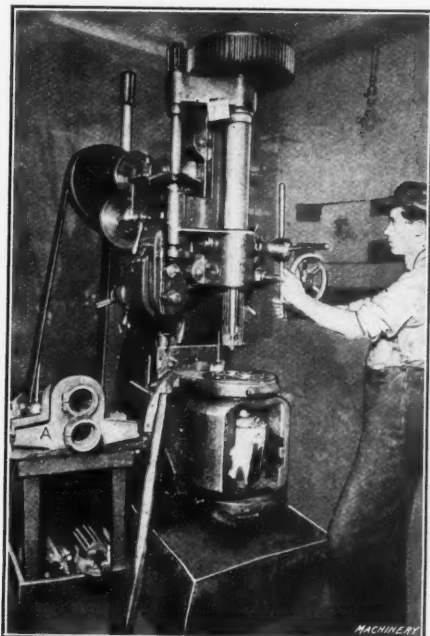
Boring and Tapping Transmission Cases in Baker Drilling Machine
